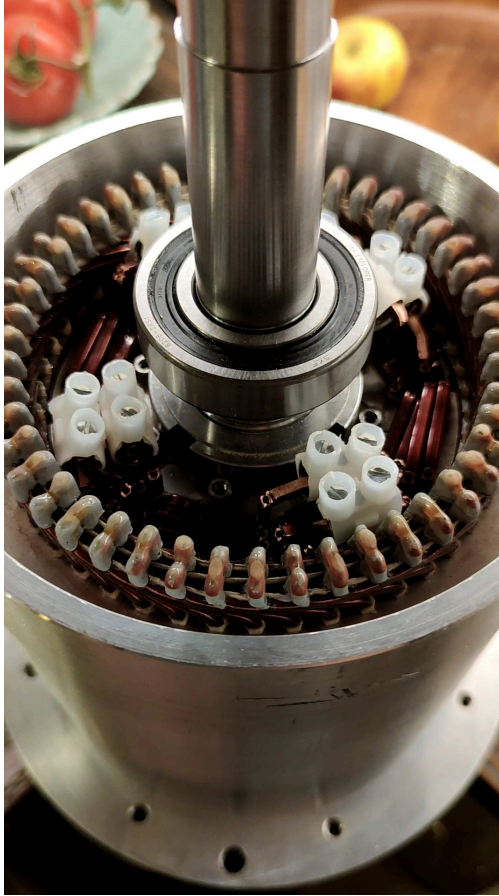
Photo of the prototype with the machine in place inside the housing, before the cool side end plate is attached.
